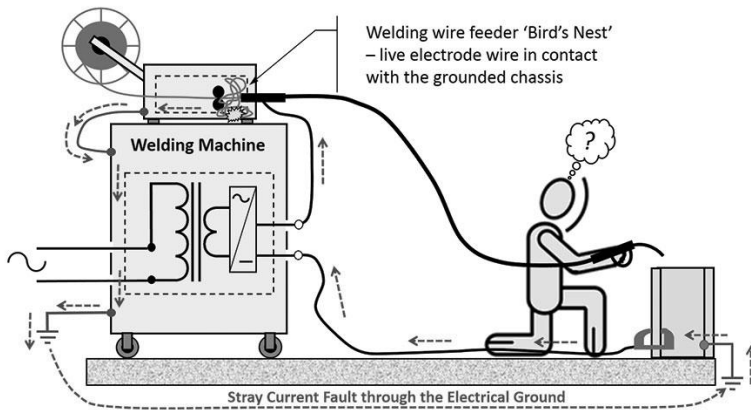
A stray welding current fault due to a minor welding equipment malfunction
